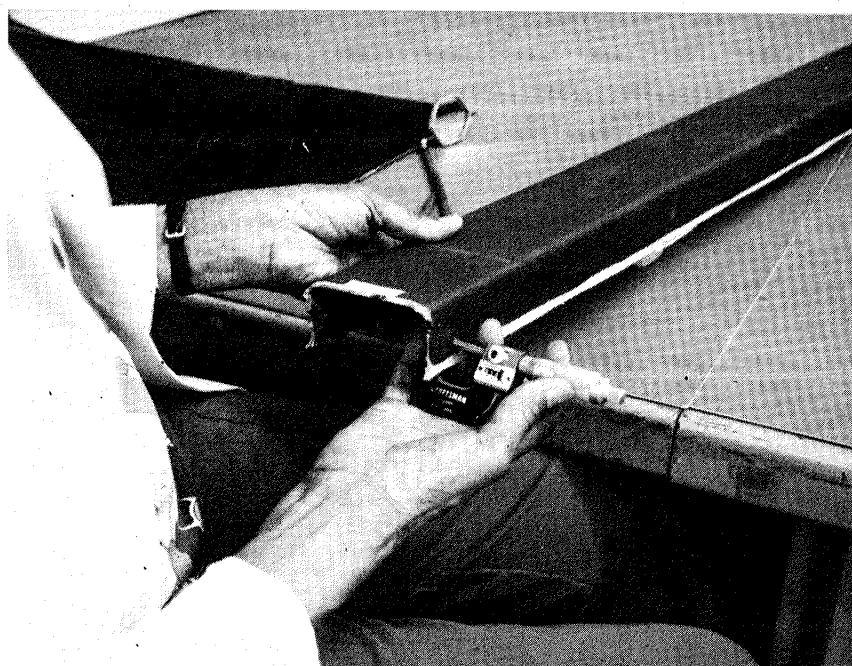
Measuring Rib Cap Flange to Determine Cured Ply Thickness
